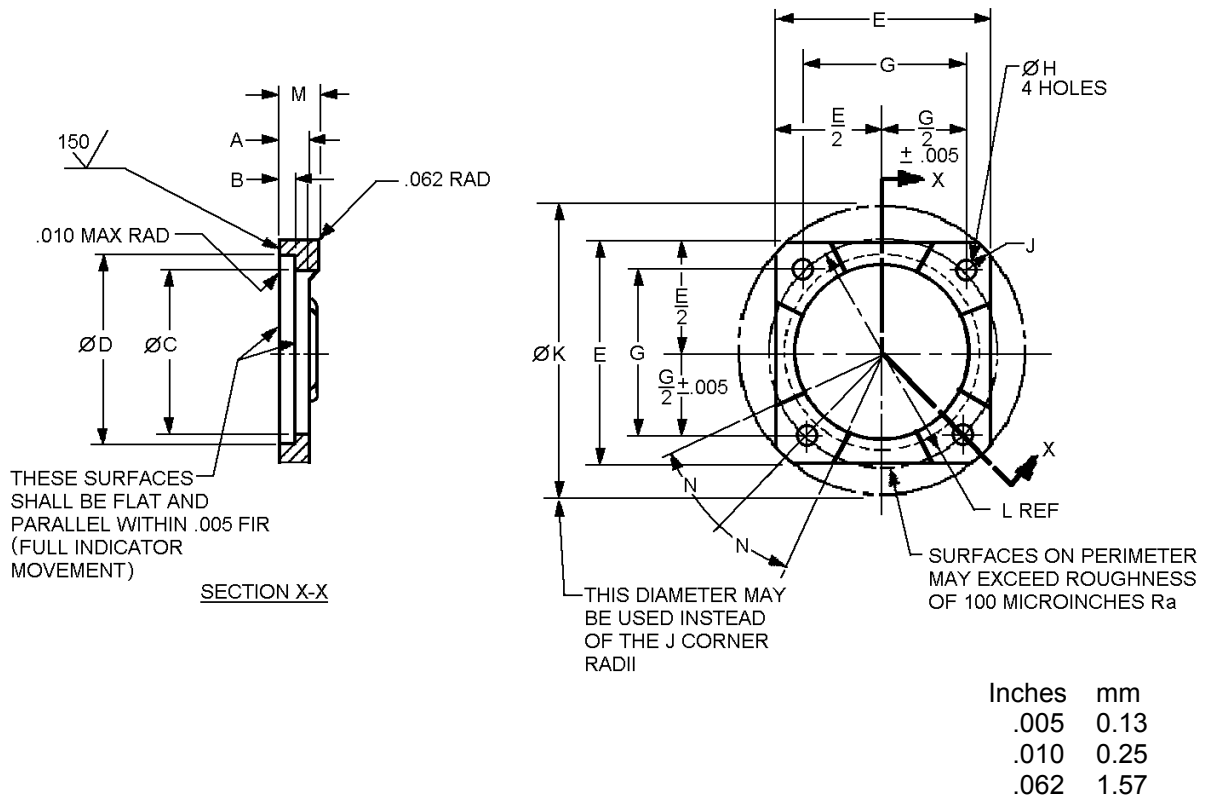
Swivel fitting flange type I rectangle size 8 through 32.
